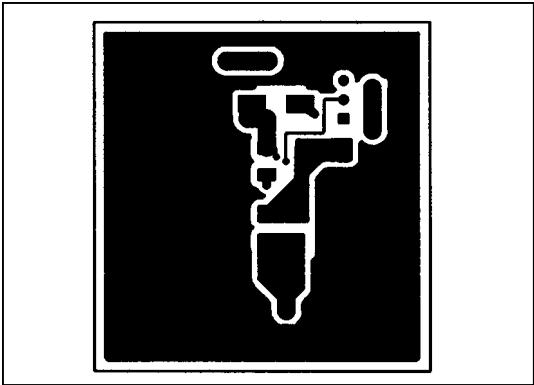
MAX877 EV Kit PC Layout (Solder Side)
